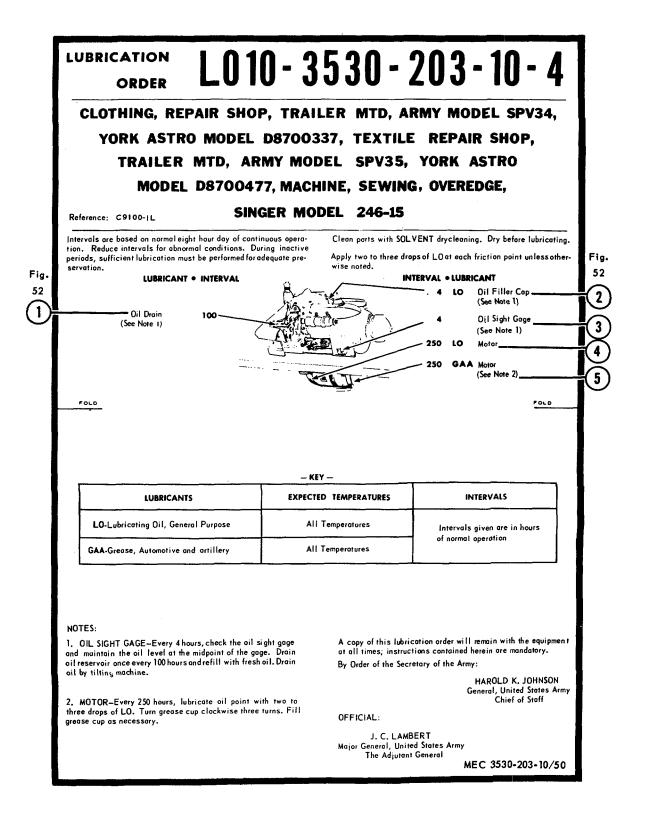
Lubrication Order 1035S0-203-10-4 for overedge sewing machine.
